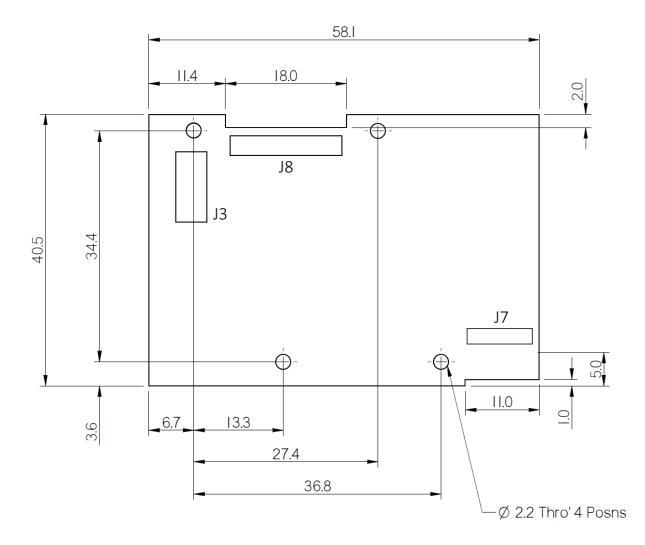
Mechanical overview of the Harrier IP Camera Interface Board; dimensions in mm. (Note – when mounted on a camera, this side usually faces away from the camera)
